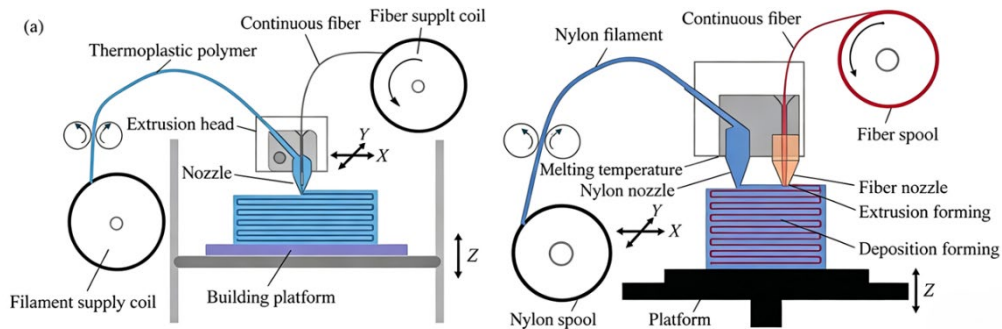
Single nozzle printing; and Double nozzle printing [6,7]
